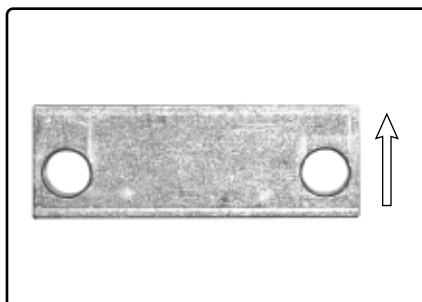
The bracket is fitted with the holes closest to the bottom edge
